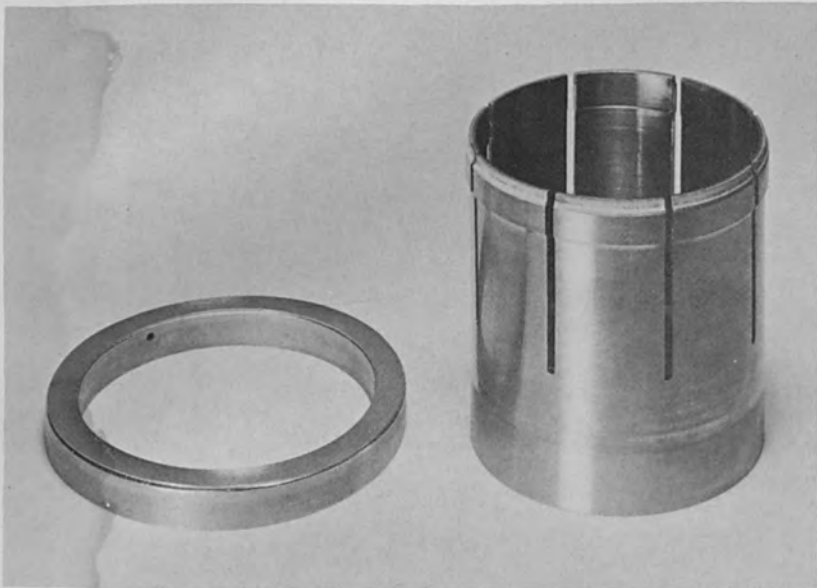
Welded 3-in.-diameter ionizer and holding tool
